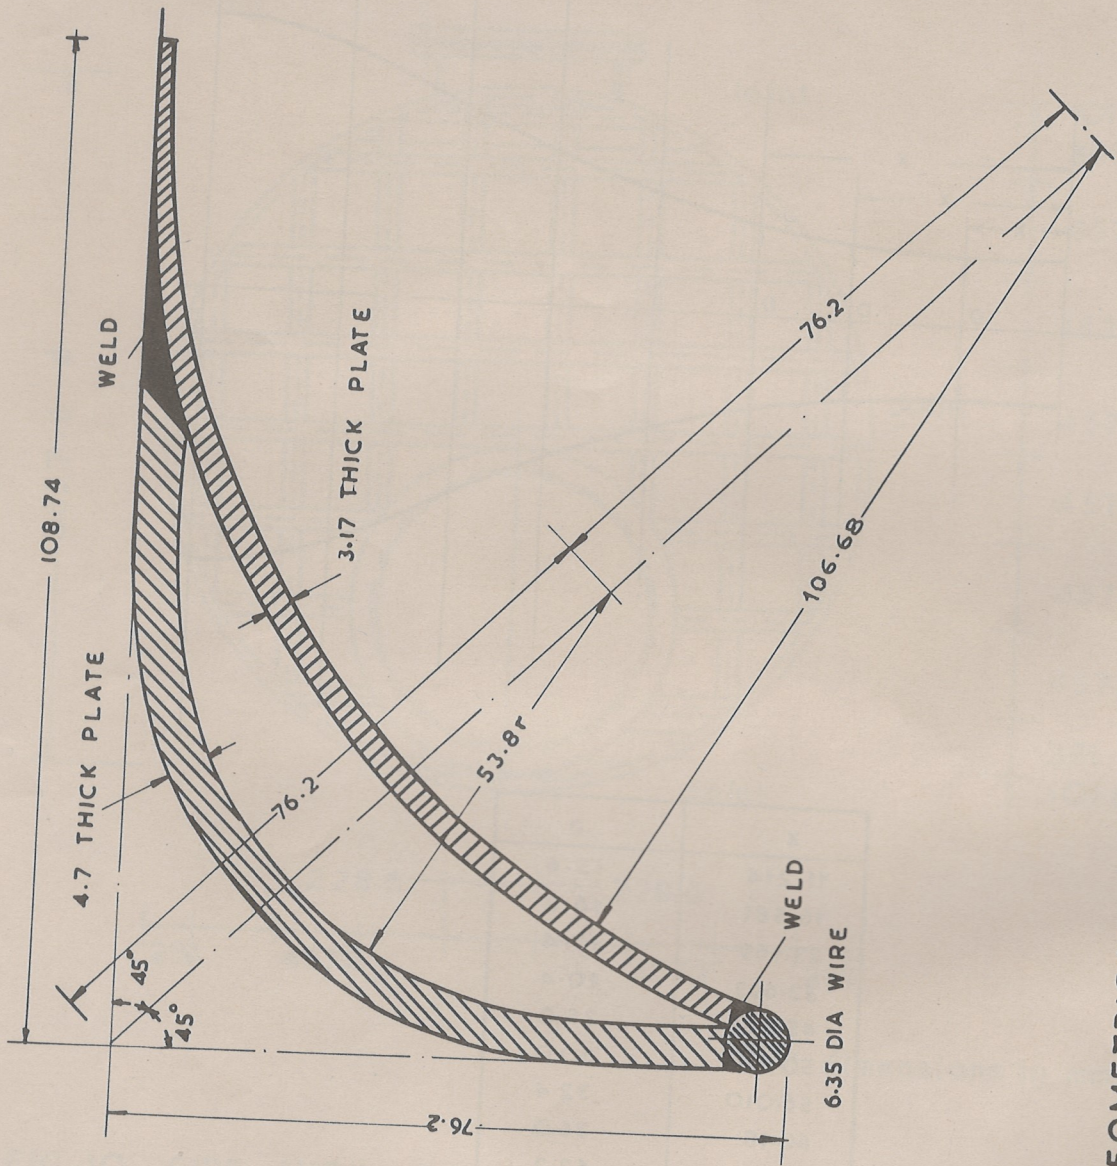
GEOMETRICAL SHAPE OF THE TURNING VANE USED IN ALL BENDS EXCEPT IN THE PUMP.
